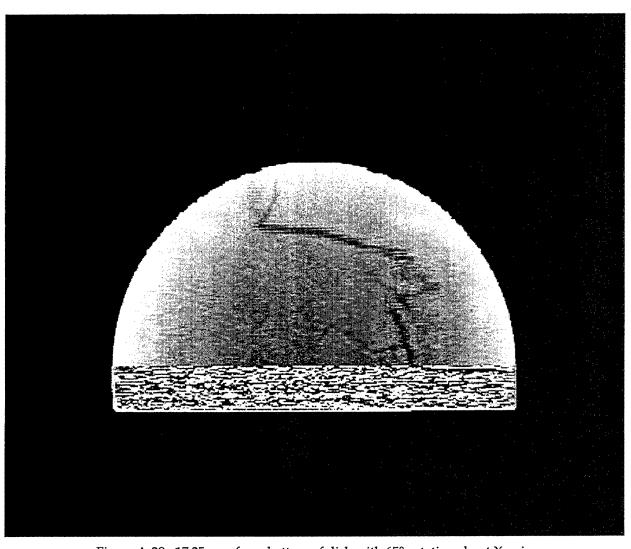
17.25 mm from bottom of disk with 65° rotation about X-axis.
